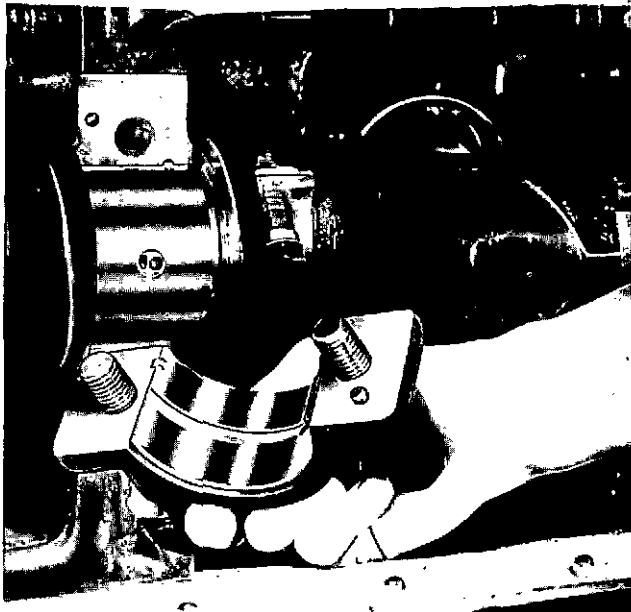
Inspecting Main Bearing and Crankshaft
